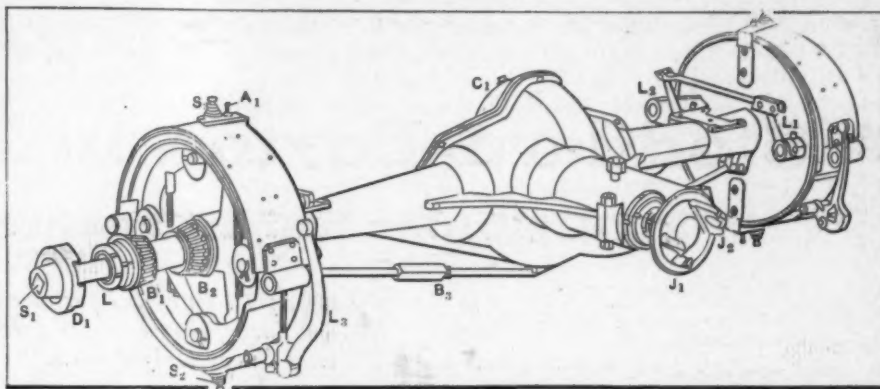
Live rear axle of the full floating type employed in Kissel Kars
